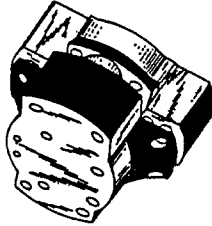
Axonometrical view of rotor sectors of considered machine.
